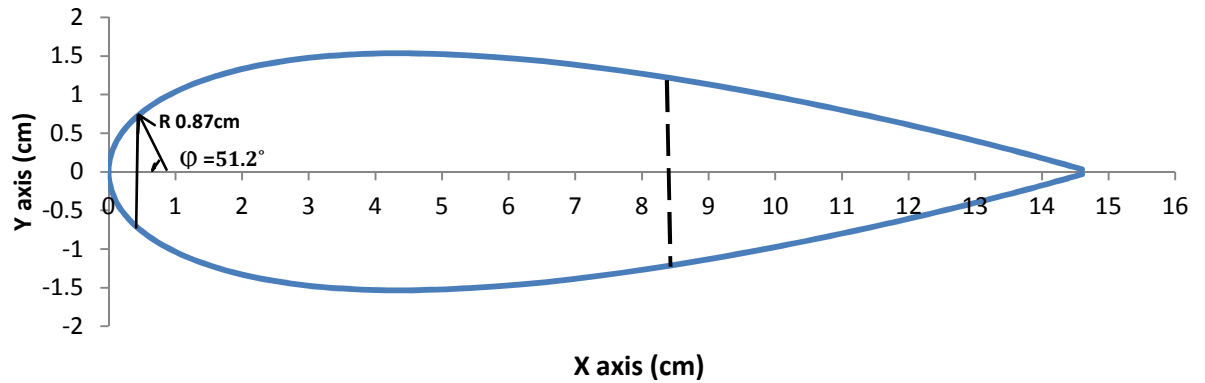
NACA 0021 airfoil dimension used for making composite airfoil inserts, dashed line shows the end of insert.
